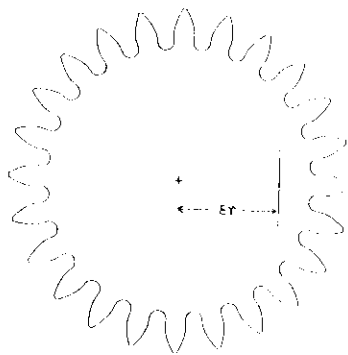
Circular driving gear with eccentric bearing (radius r , eccentricity e) and involute tooth system.
